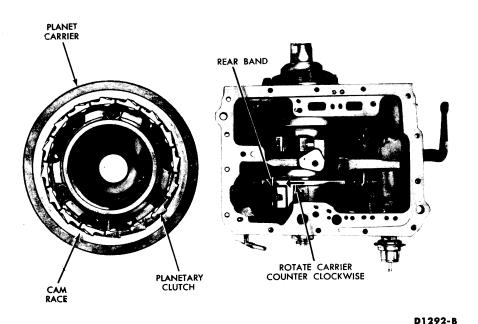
Planetary Clutch Installation in Carrier—Using Chamfered Center Support
